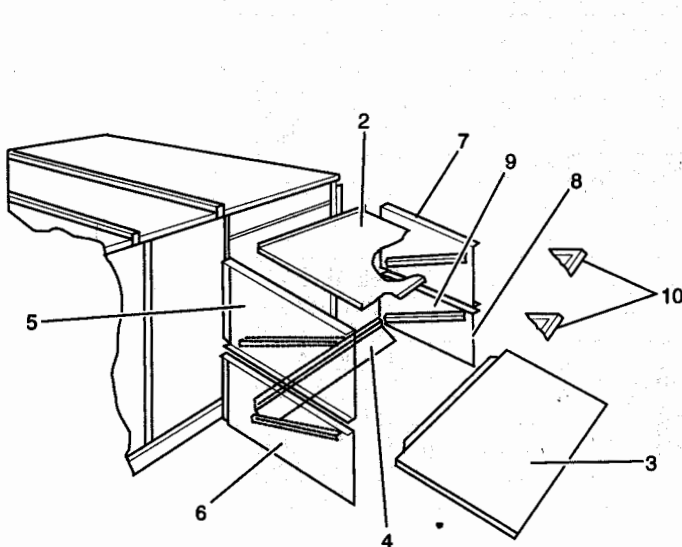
ECONOMIZER / MOTORIZED DAMPER RAIN HOOD ASSEMBLY (ITEM 1)
